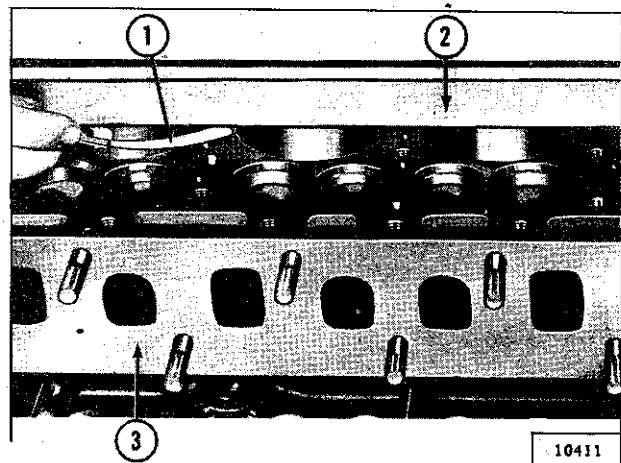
CHECKING CYLINDER BLOCK FOR DISTORTION
